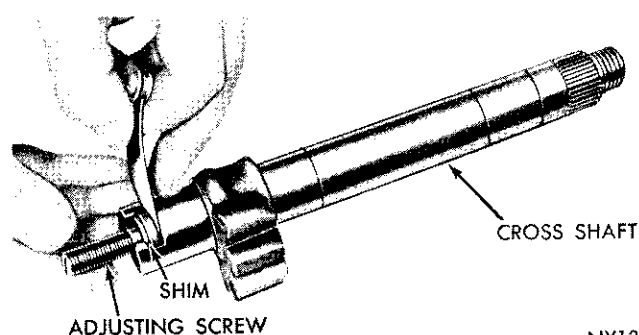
Measuring Cross Shaft Adjusting Screw End Clearance
